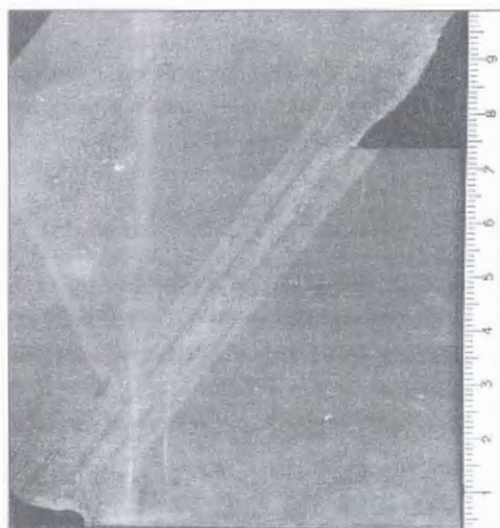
Macrosection of welded joint of mock-up of the front sub-assembly «nose» of armoured hull of medium tank, made by EBW
